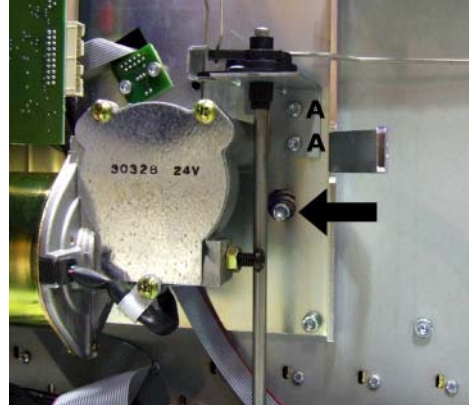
The screw of the crank mechanism is behind the hole in the motor bedstead.
